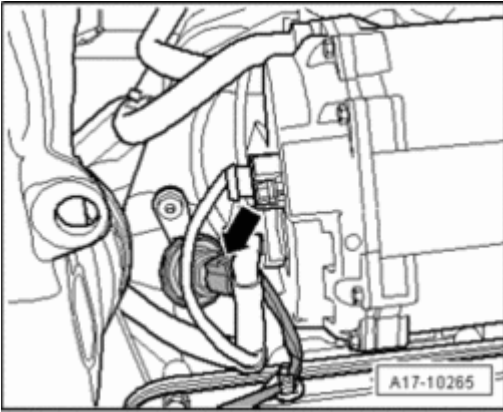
Disconnecting Electrical Harness Connector From Oil Pressure Switch F1
